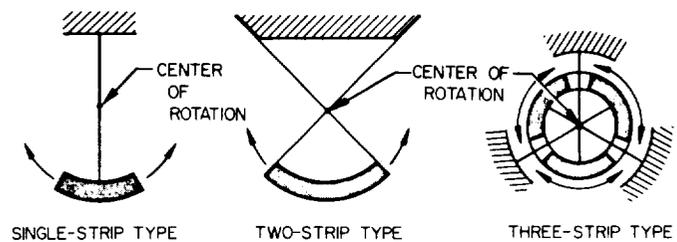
Flexure suspensions (flat springs that support a rotating part). Three types are shown
